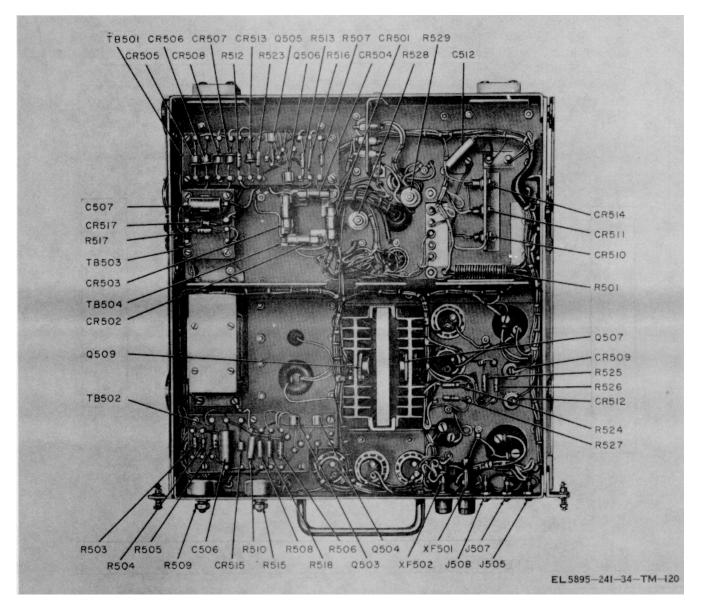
Power Supply PP-2803/FSW-8, bottom view, parts location.
